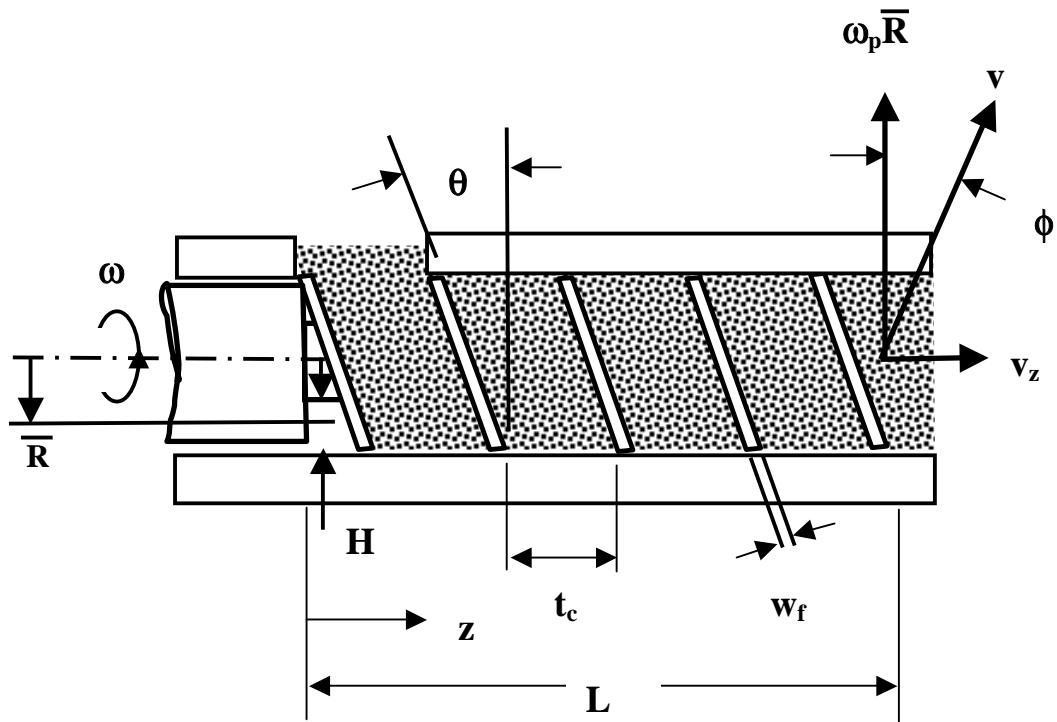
Solids Conveying Lead Angle, ϕ . The lead angle is defined at the end of the solids conveying section, L .
